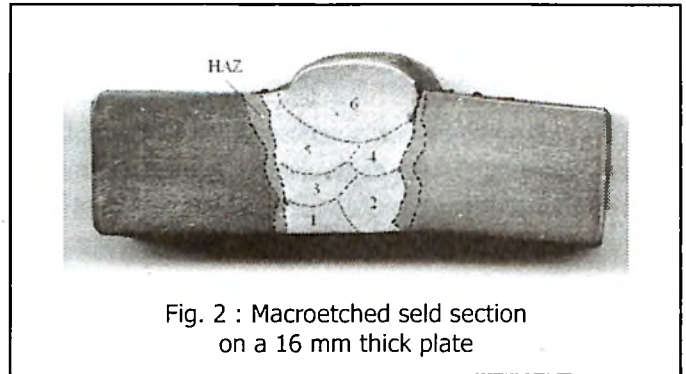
Macroetched sold section on a 16 mm thick plate
